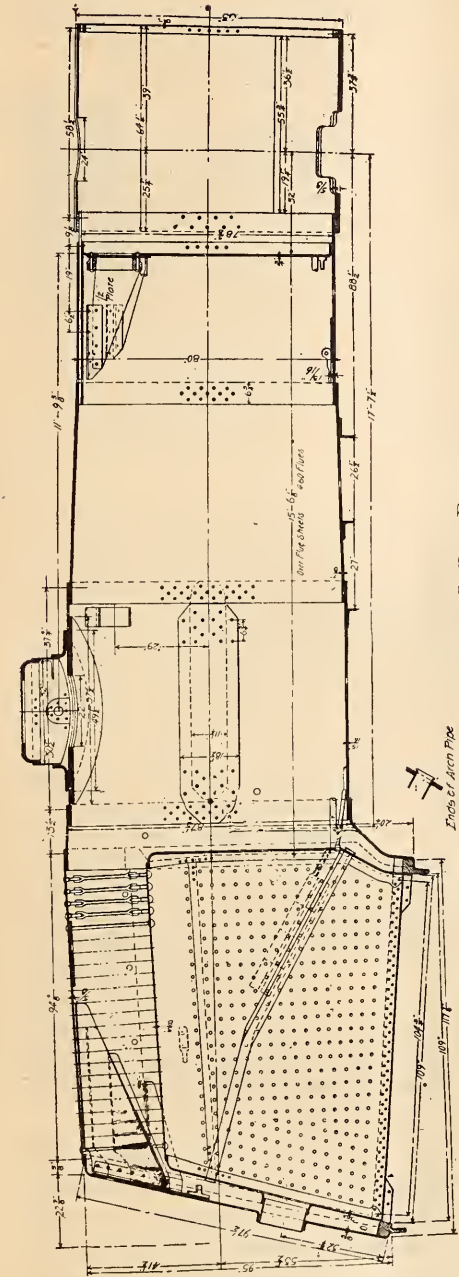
HEAVY FREIGHT LOCOMOTIVE—L. S. & M. S. RY. BOILER.
